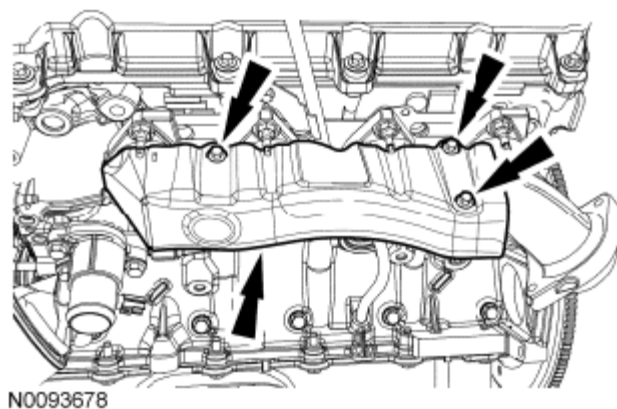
Locating LH Exhaust Manifold Heat Shield
